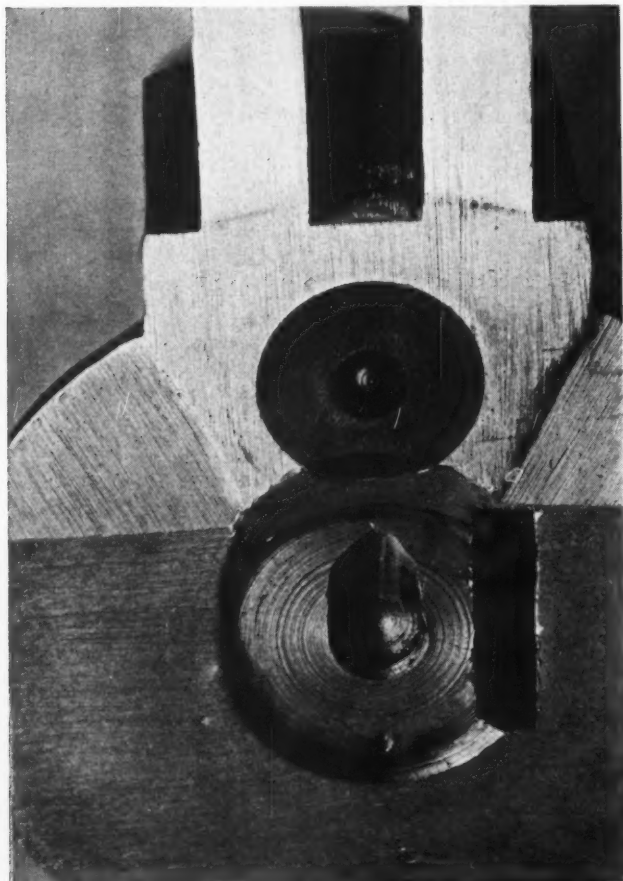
SMITH & WESSON SAFETY HAMMERLESS REVOLVER—VIEW OF FRAME BACK OF CYLINDER SHOWING RECOIL PLATE AND FIRING PIN
